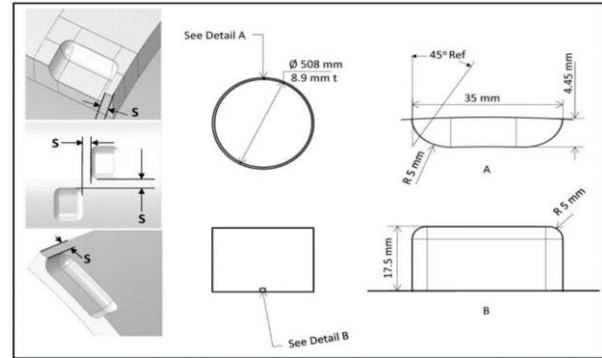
Characterized rectangle pitting corrosion details [4]
